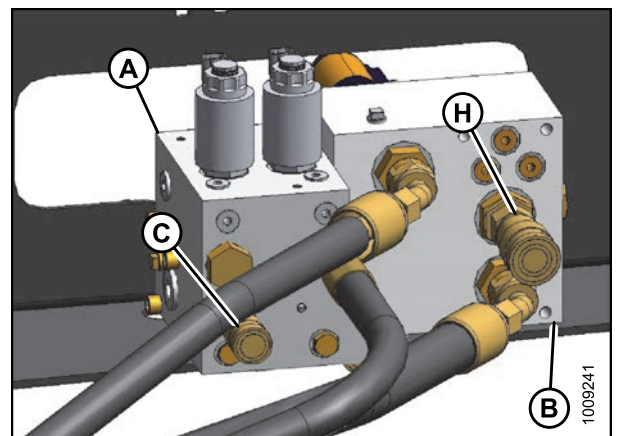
Valve Blocks without Reverser Valve Configured for Auger Header
